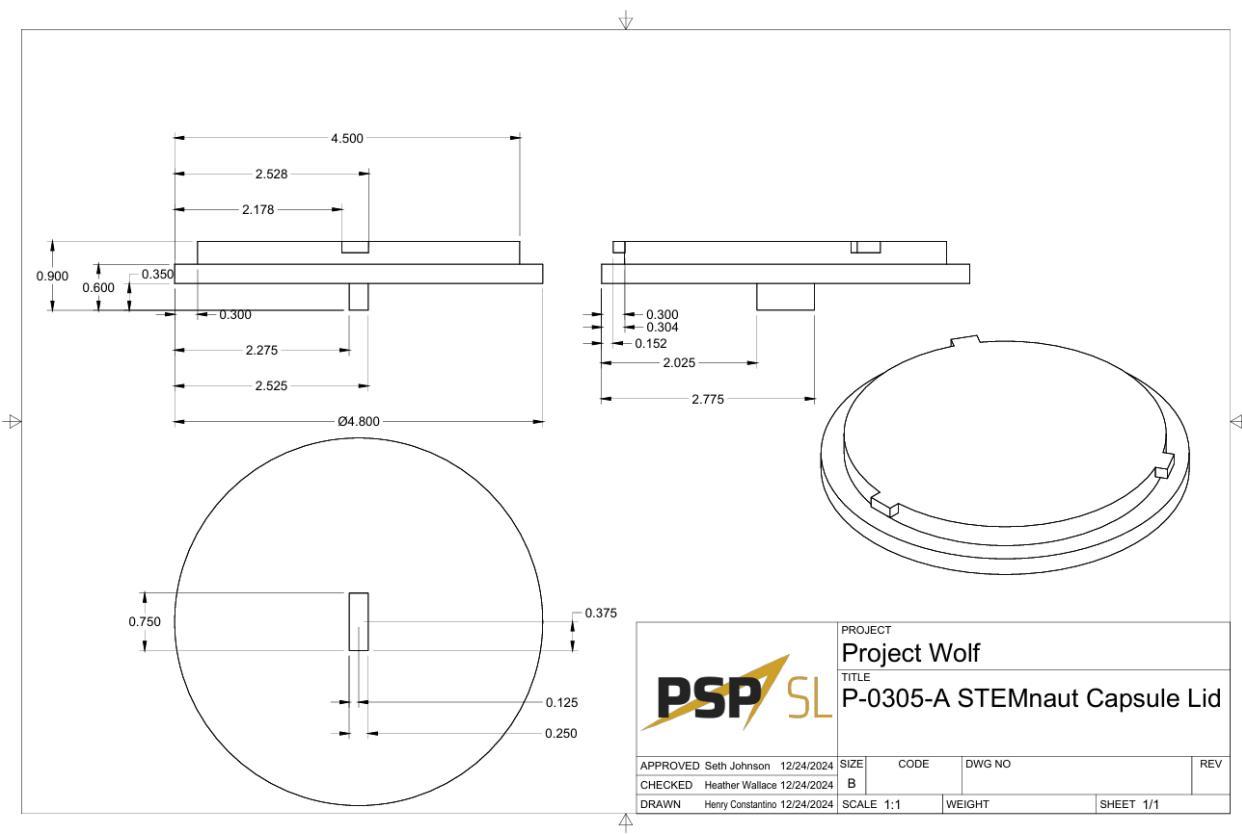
STEMnaut Capsule Lid Technical Drawing
